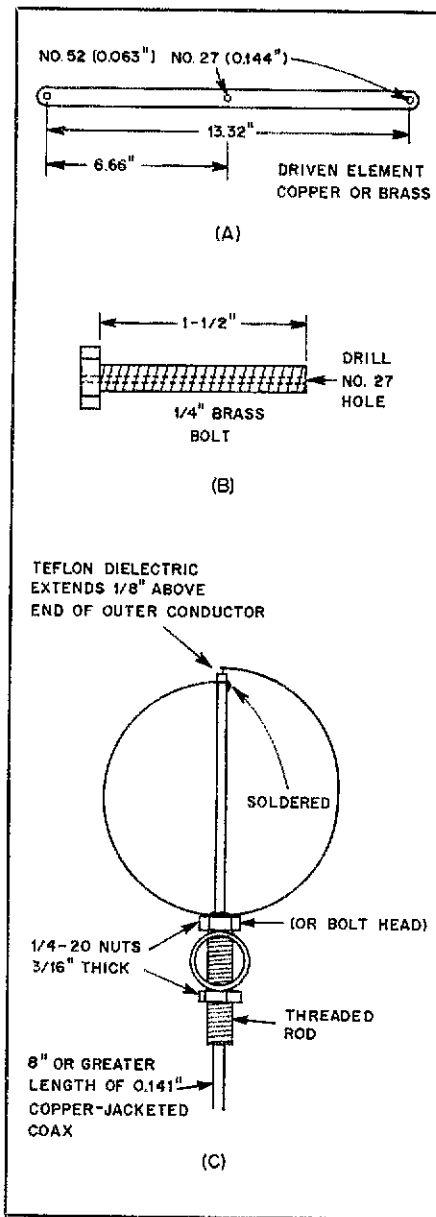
Driven-element details. The element strap is shown at A. At B is the brass mounting fixture. Part C details the driven element assembly.
